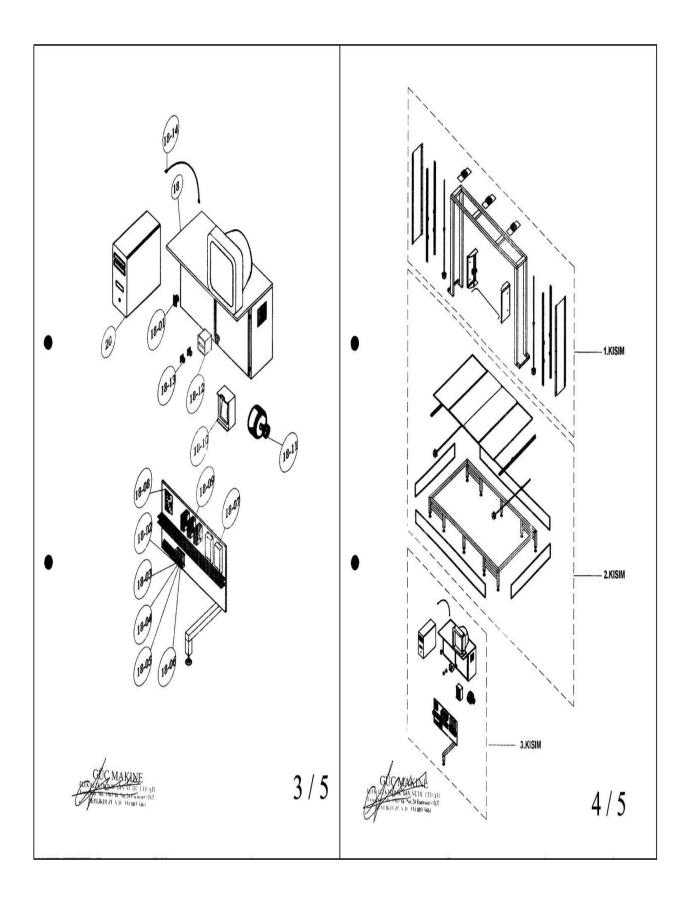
2007/04961 'CNC Foam Cutting Machine'[W]
